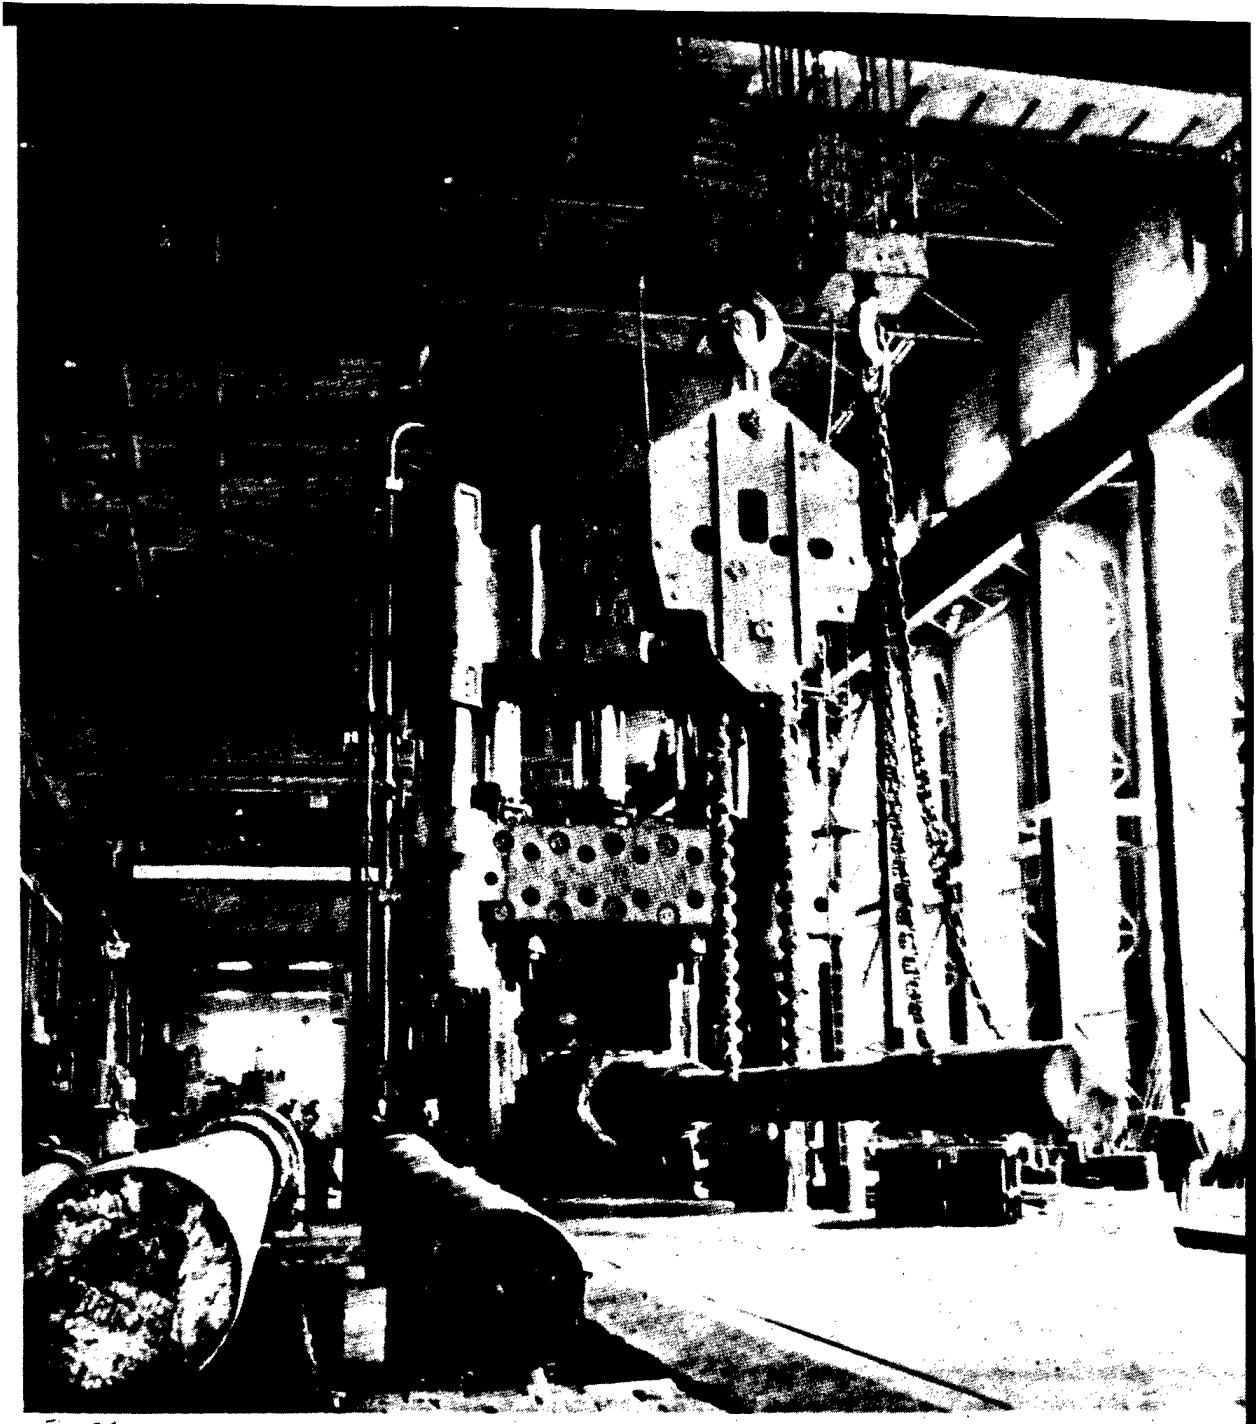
A 12,000-ton free forging hydraulic press built by the Fularji Heavy Machinery Plant No 1 in Heilongjiang
